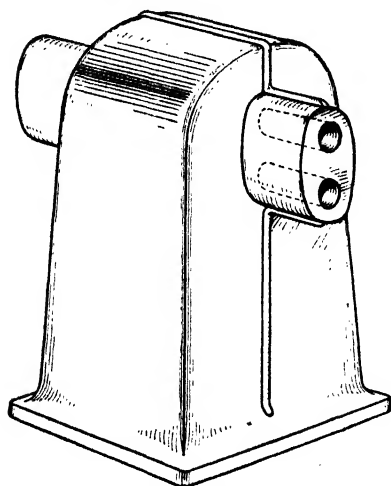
A hollow die casting of this shape has to be parted in a plane at right angles to the base and passing through the hole axes of bosses. If a narrow head is provided at the parting, flash is easily removed without leaving noticeable toolmarks on adjacent surfaces. Such marks are almost unavoidable otherwise, and it requires much extra cost in grinding and polishing to remove them from a flat or even from a crowned surface.
